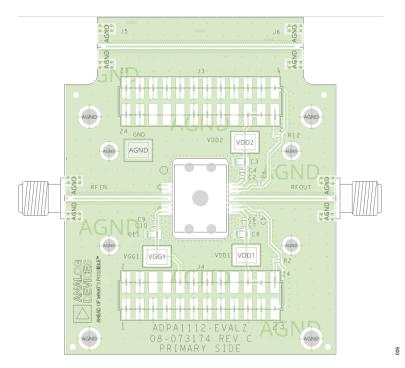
ADPA1112-EVALZ Assembly Drawing (J5 and J6 Not Installed)
